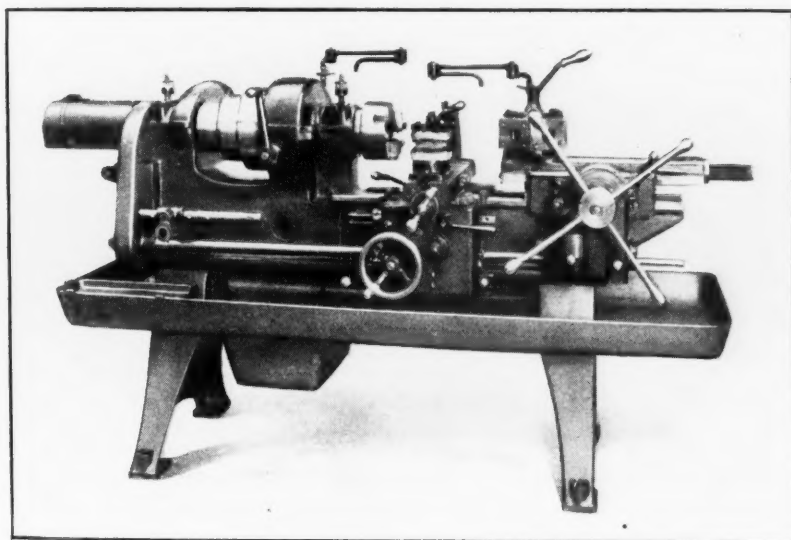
Cone Head Universal Turret Lathe of Improved Design
